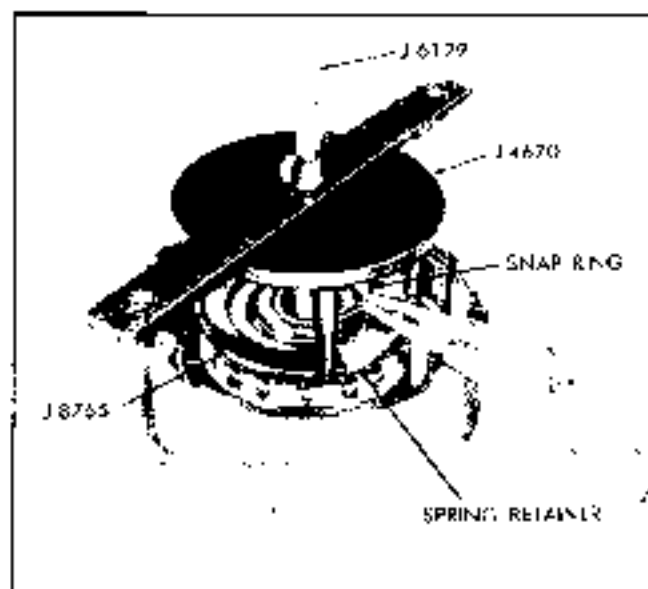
E-81 Removing Forward Clutch Spring Retainer Snap Ring
